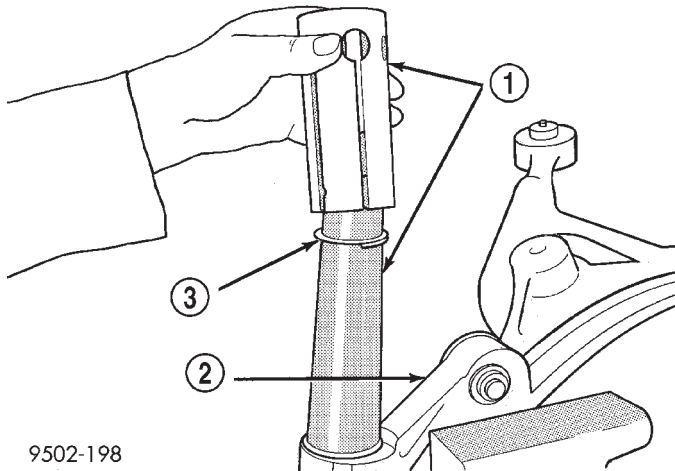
Retaining Ring And Expandable Collar Installed On Tool
